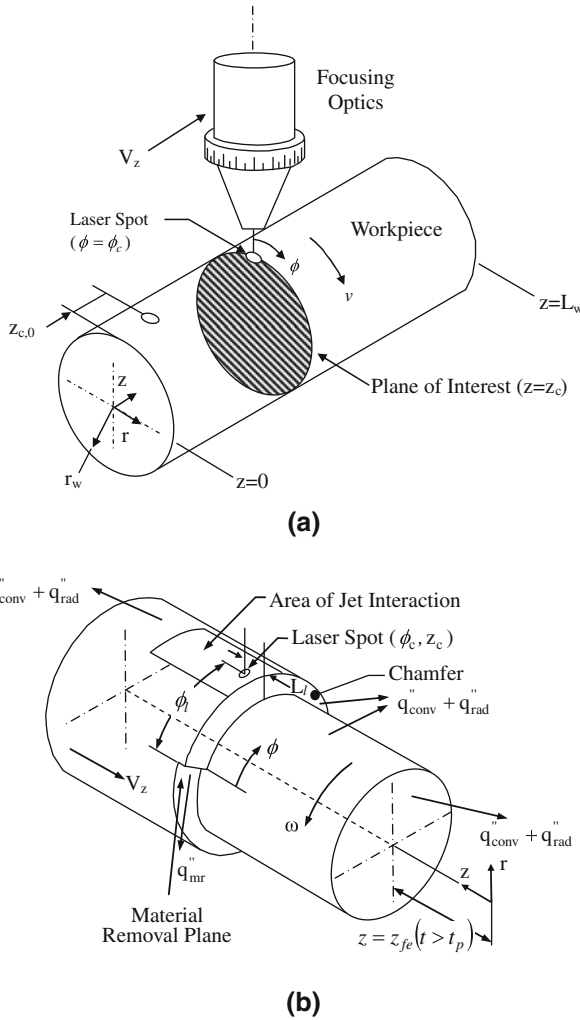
Coordinate systems for the rotating workpiece during (a) laser heating without material removal [53] and (b) laser assisted machining with material removal [54]
